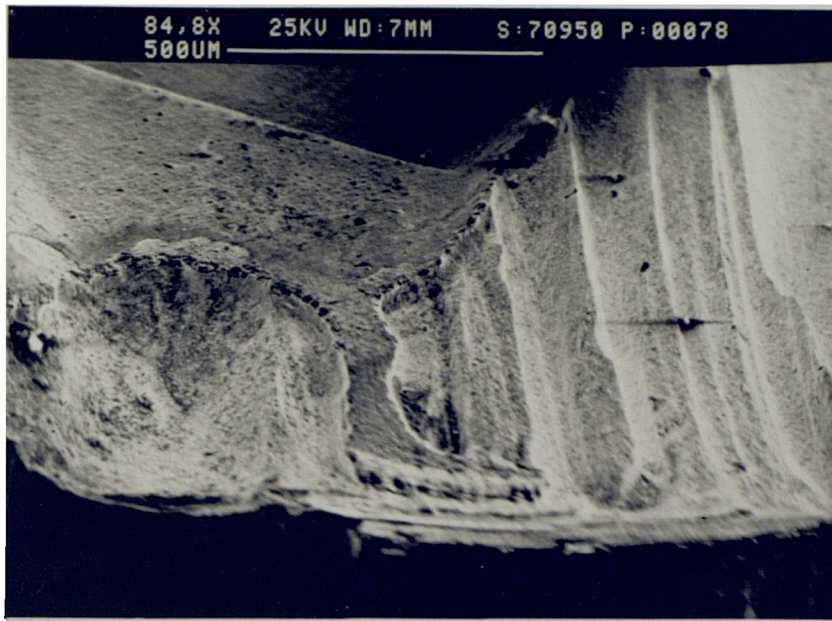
shows two different types of worn surface on the rake face. The first is surface in which very large fragments of tool coating have been removed in the region at the end of depth of cut, outside the crater. The surface of this area suggests that attrition wear was dominant in this region. The second surface is a classical form of crater wear, where the surface has formed as a result of plucking out particles adhering to the underside of the swarf and then carried away in the chip flow direction. This surface is smoothly worn and ridged.
